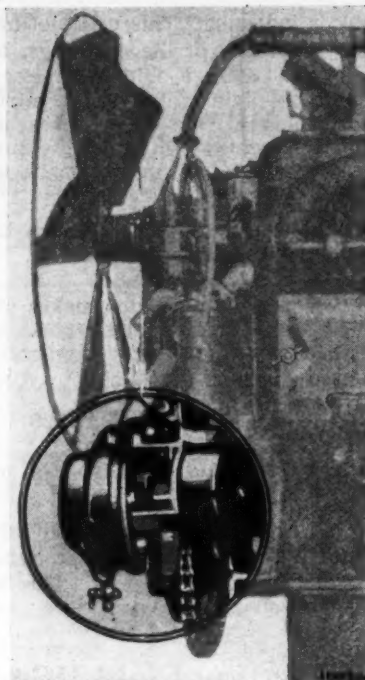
Left front side of engine used in 1916 4-cylinder Studebaker car. It is suggested that a high tension magneto be driven from the pump shaft, shown in the circle
